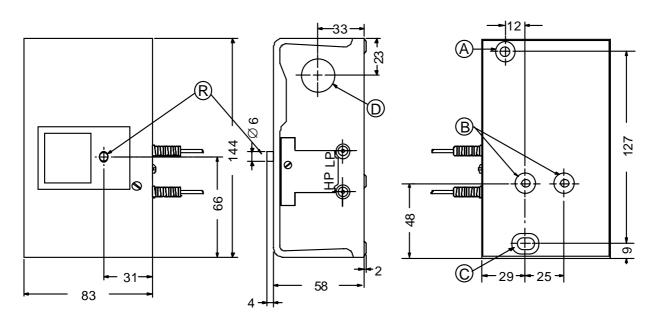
Style 13 1.90 cm capillary 2. 7/16-20 UNF nut for 1/4" SAE flare tube
